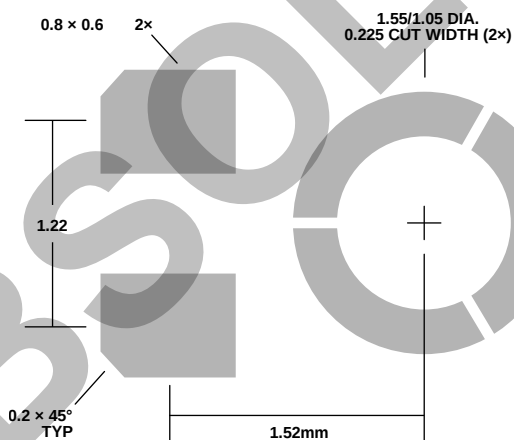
Suggested Solder Paste Stencil Pattern Layout
